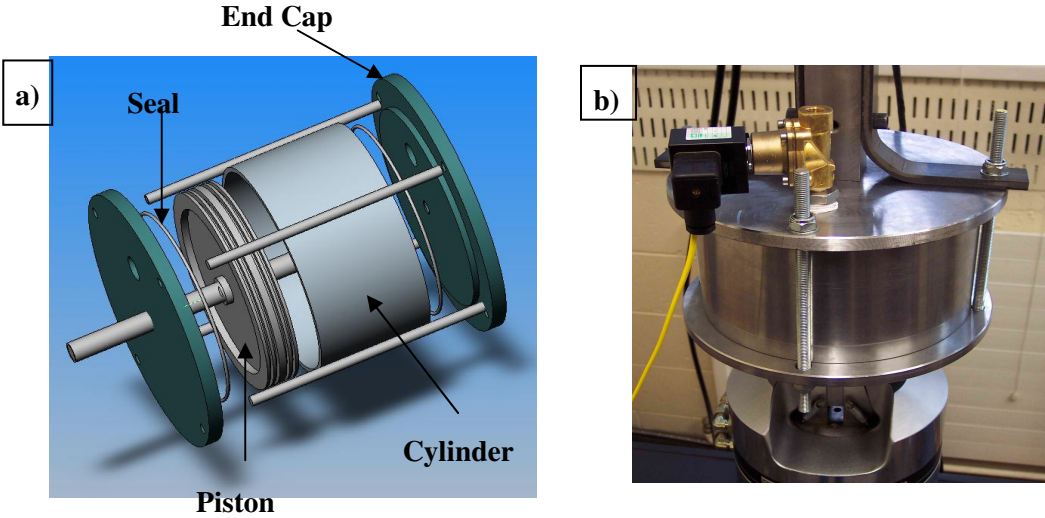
a) Exploded view of prototype indication components, b) Prototype device in MTS test rig.
